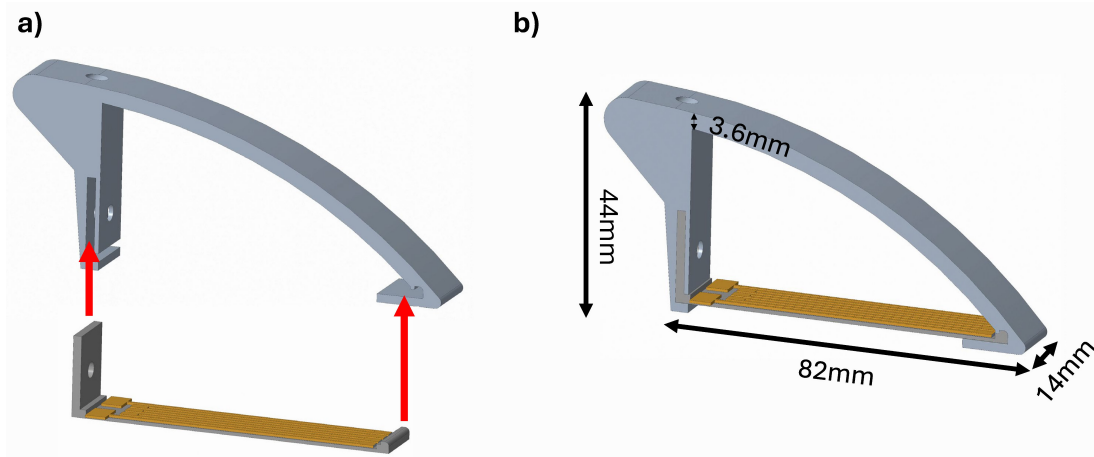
Open Configuration Robotic Finger a) View showing the assembly of the open configuration finger with the resistive sensor positioned underneath b) Assembled open configuration with complete dimensional specifications
